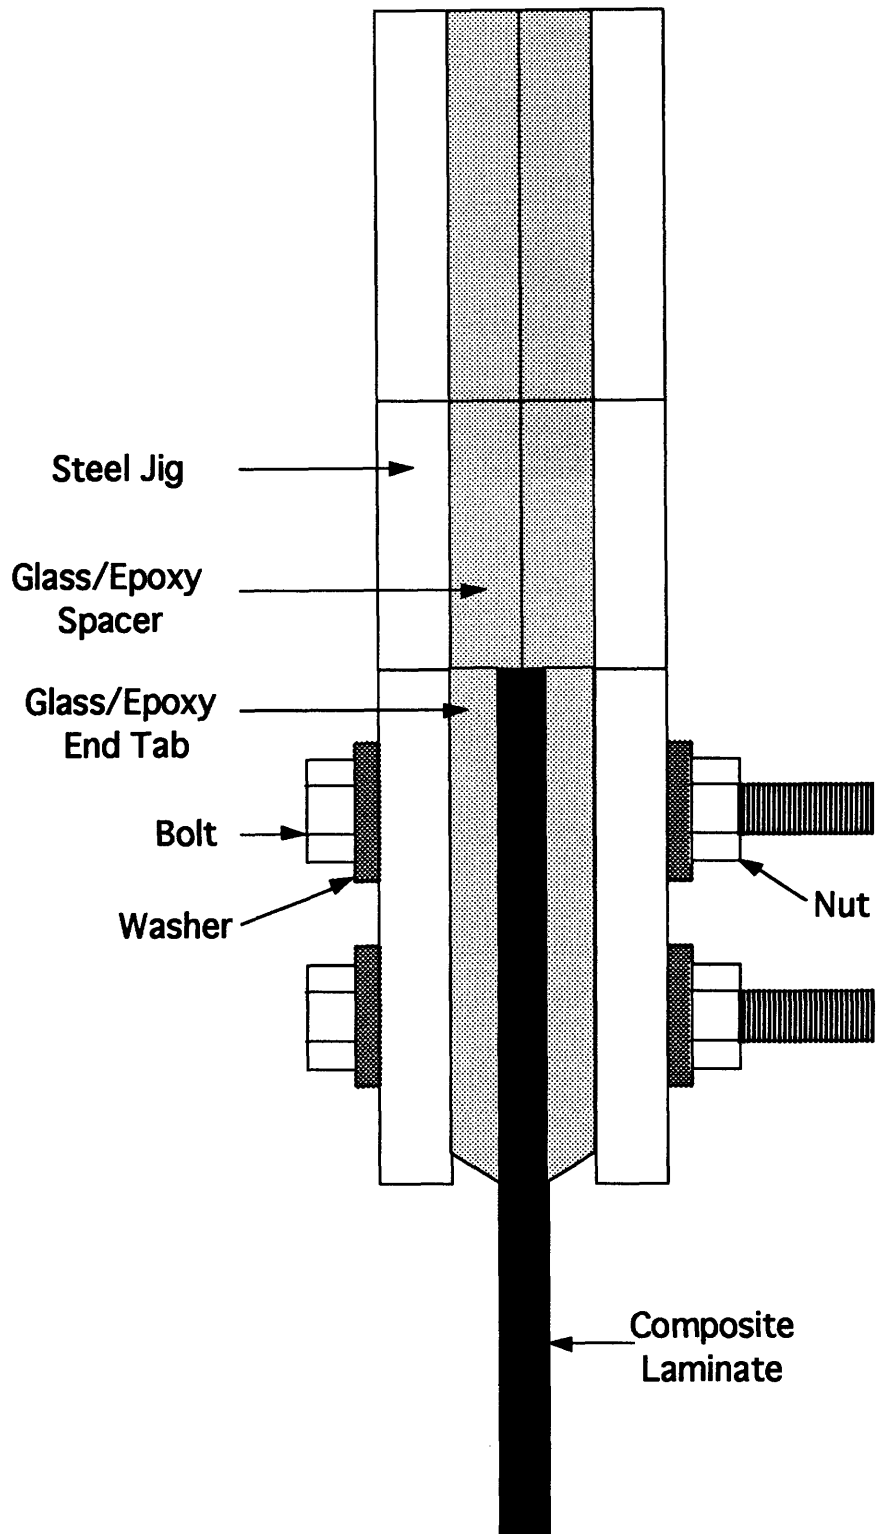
Side View of Panel Secured in Mounting Jig.
